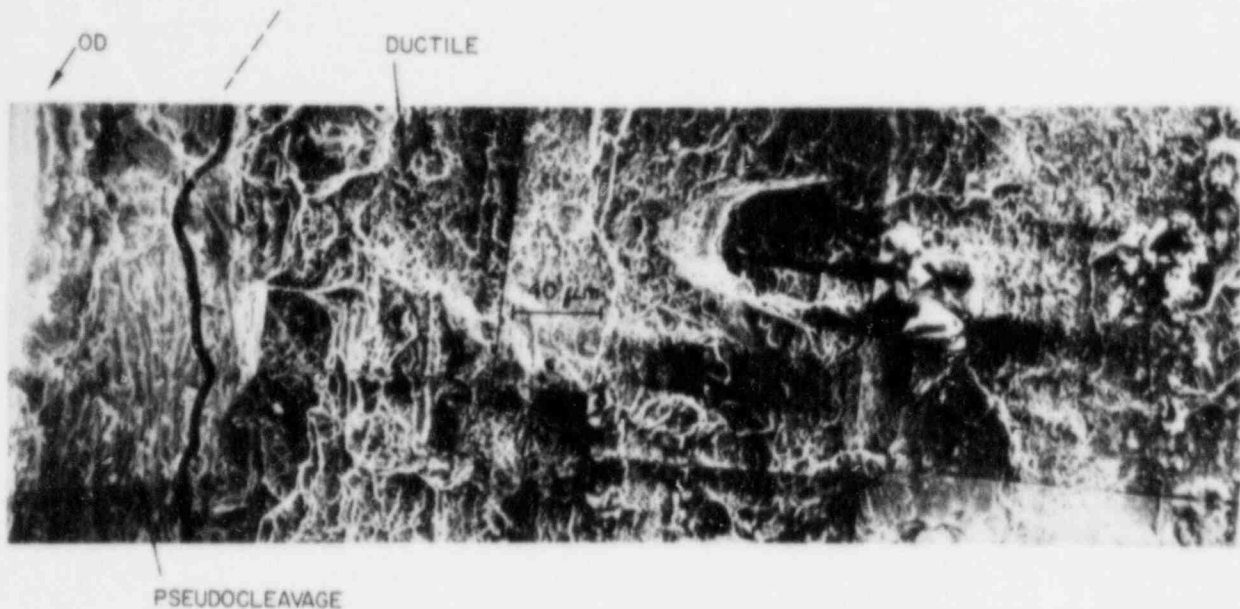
Fracture Surface Morphology of H. B. Robinson Reactor Cladding Specimen 217C2B after Fracture by Internal Gas Pressurization. Pseudocleavage is visible over ~17% of the distance from the outer to the inner surface.
